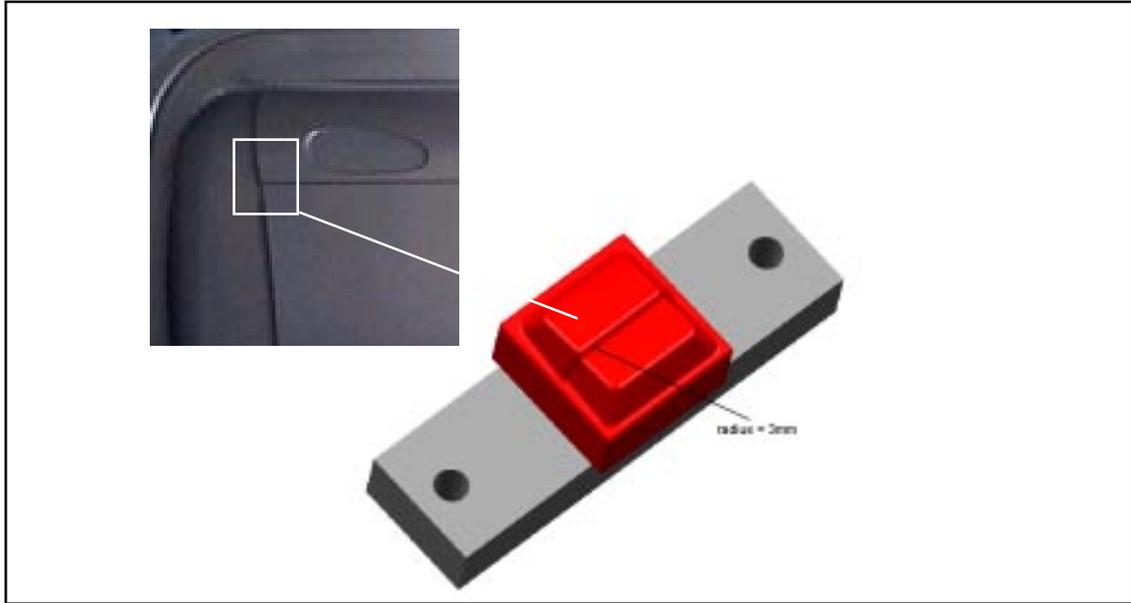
Segment of ULSAC Panel Front Door Outer with small tryout tool insert
